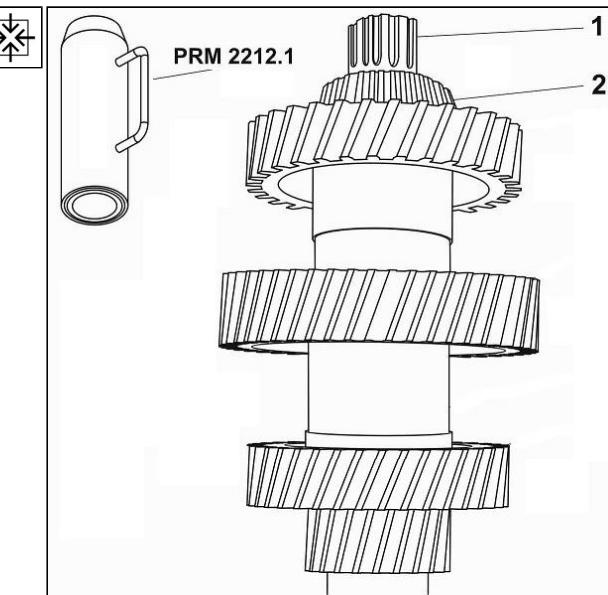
Use of tools PRM 2211 and PRM 2212.1
